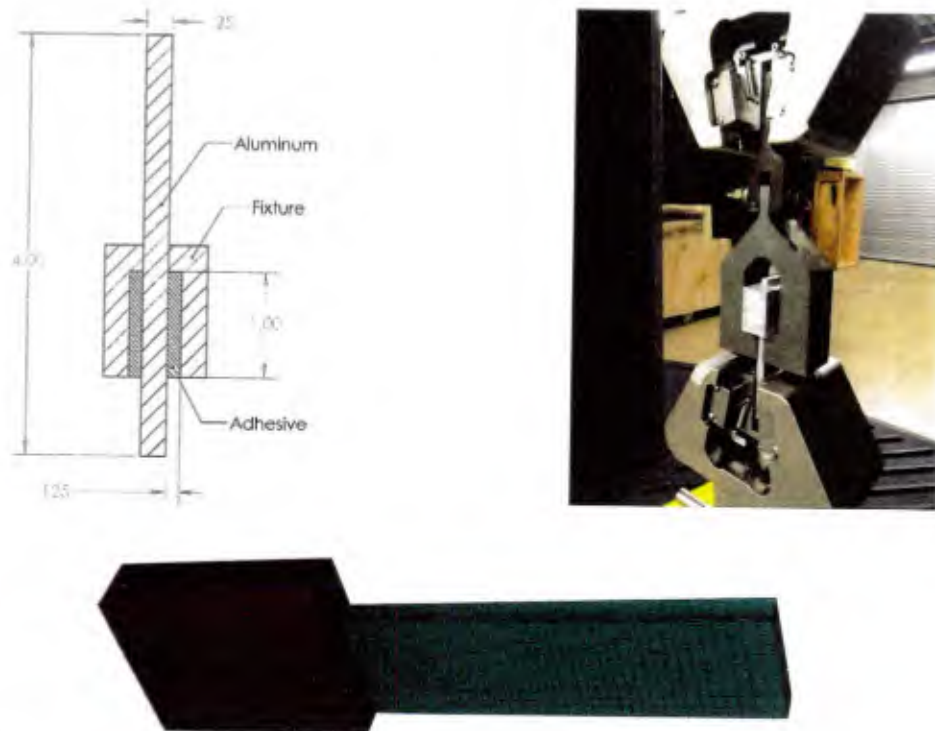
The test specimen dimensions, test fixture, and corresponding FE model used to investigate shear failure at the metal/resin interface.
